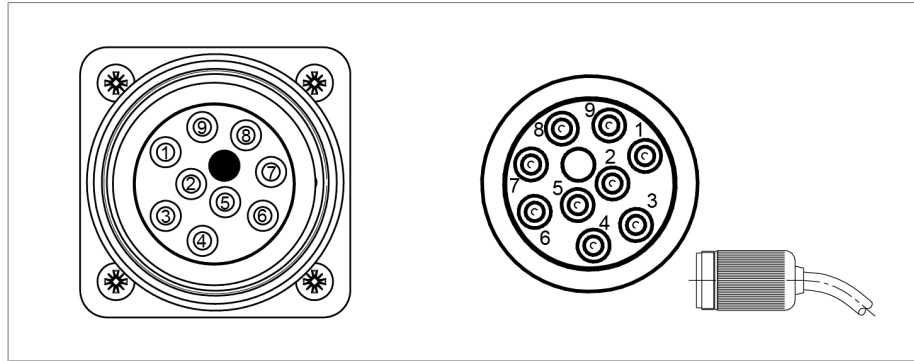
ANSI plug on the device (left); Connecting cable with ANSI socket (right)
